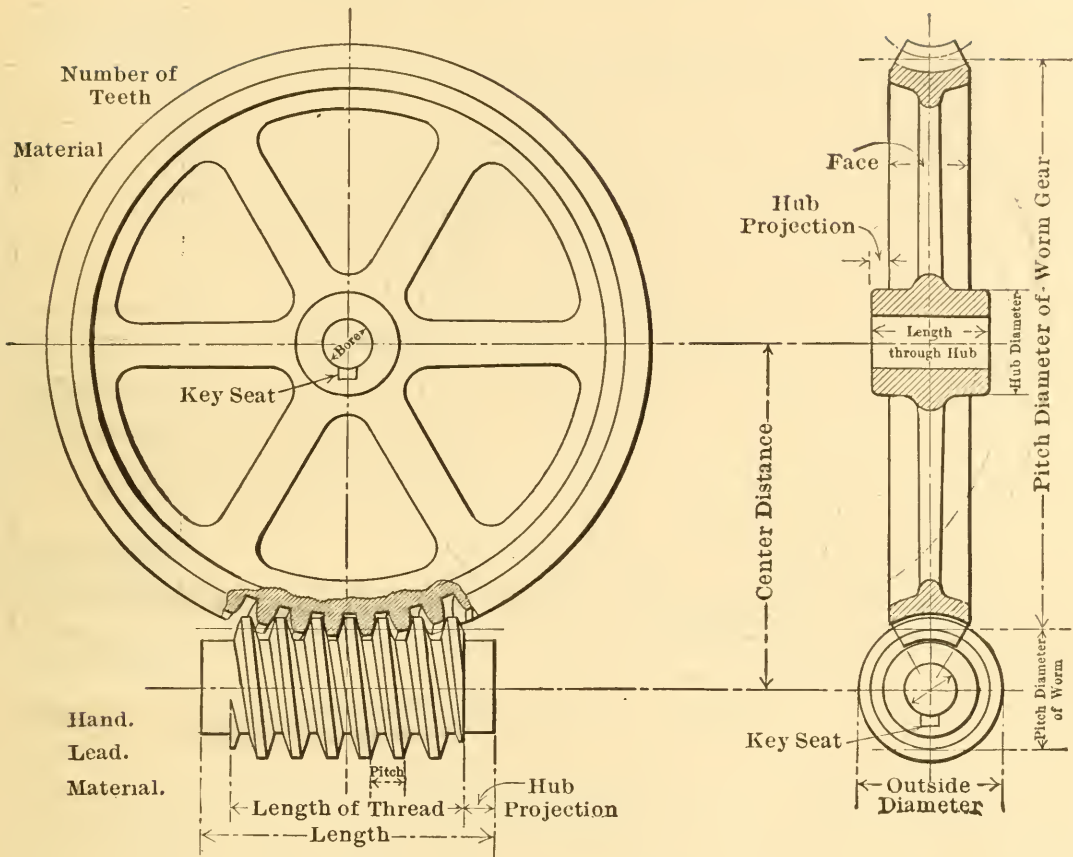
NECESSARY DIMENSIONS TO DESCRIBE WORM GEARS.
